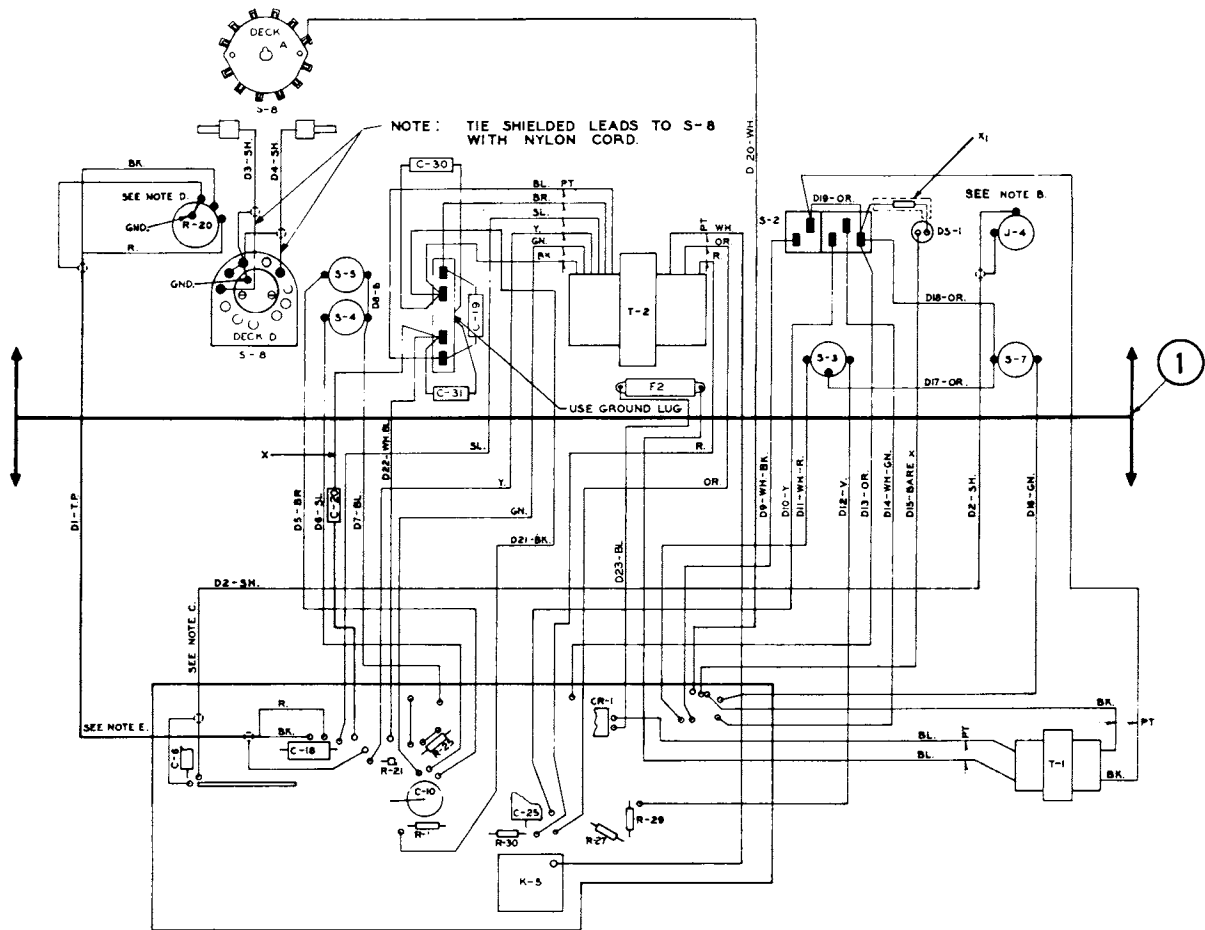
Chassis Wiring, WW-5044-1D (Part of Final Assembly, Figure 1).
